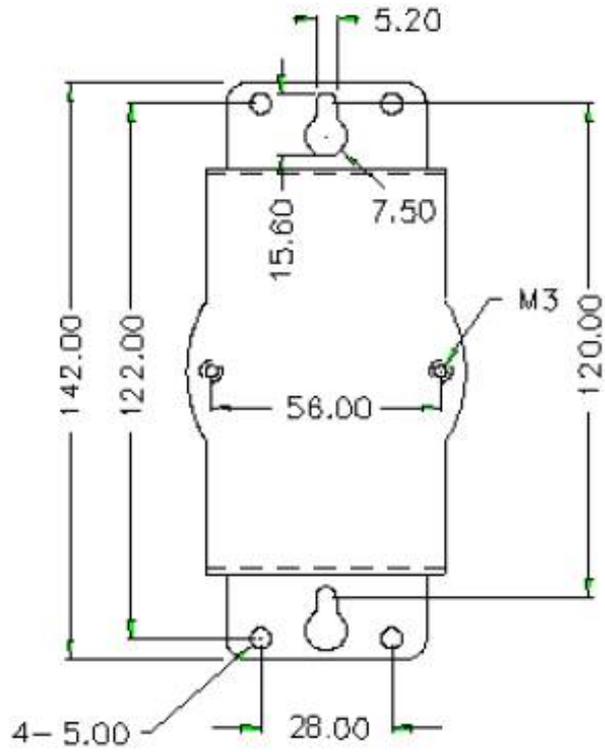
ADAM-4572 Panel Mounting Bracket Dimensions
